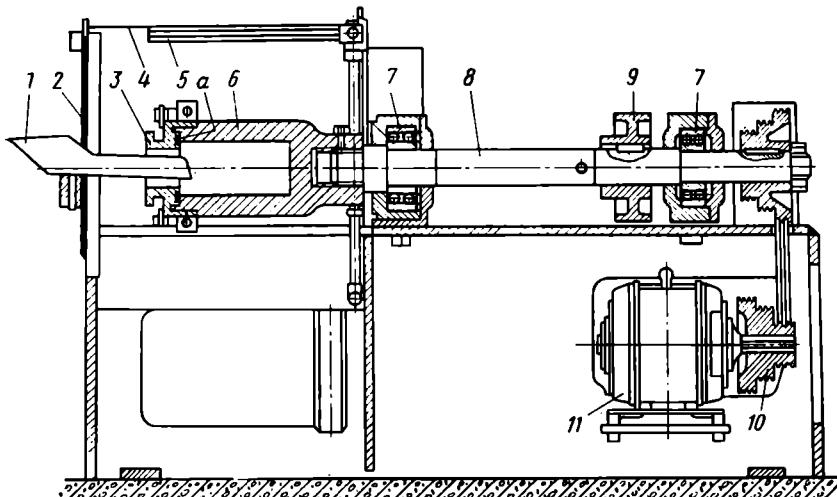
Spindle-type horizontal-mold centrifugal casting machine
